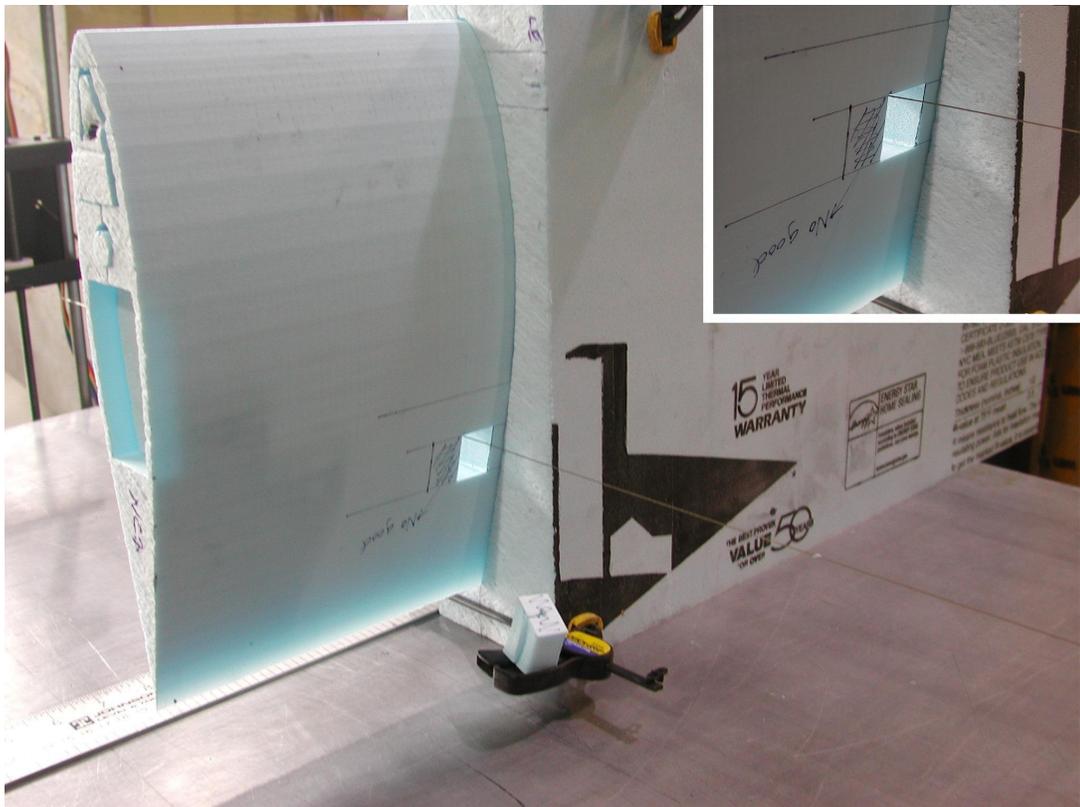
Center Wing-Section – mounting thru-hole done, detail view top right.
